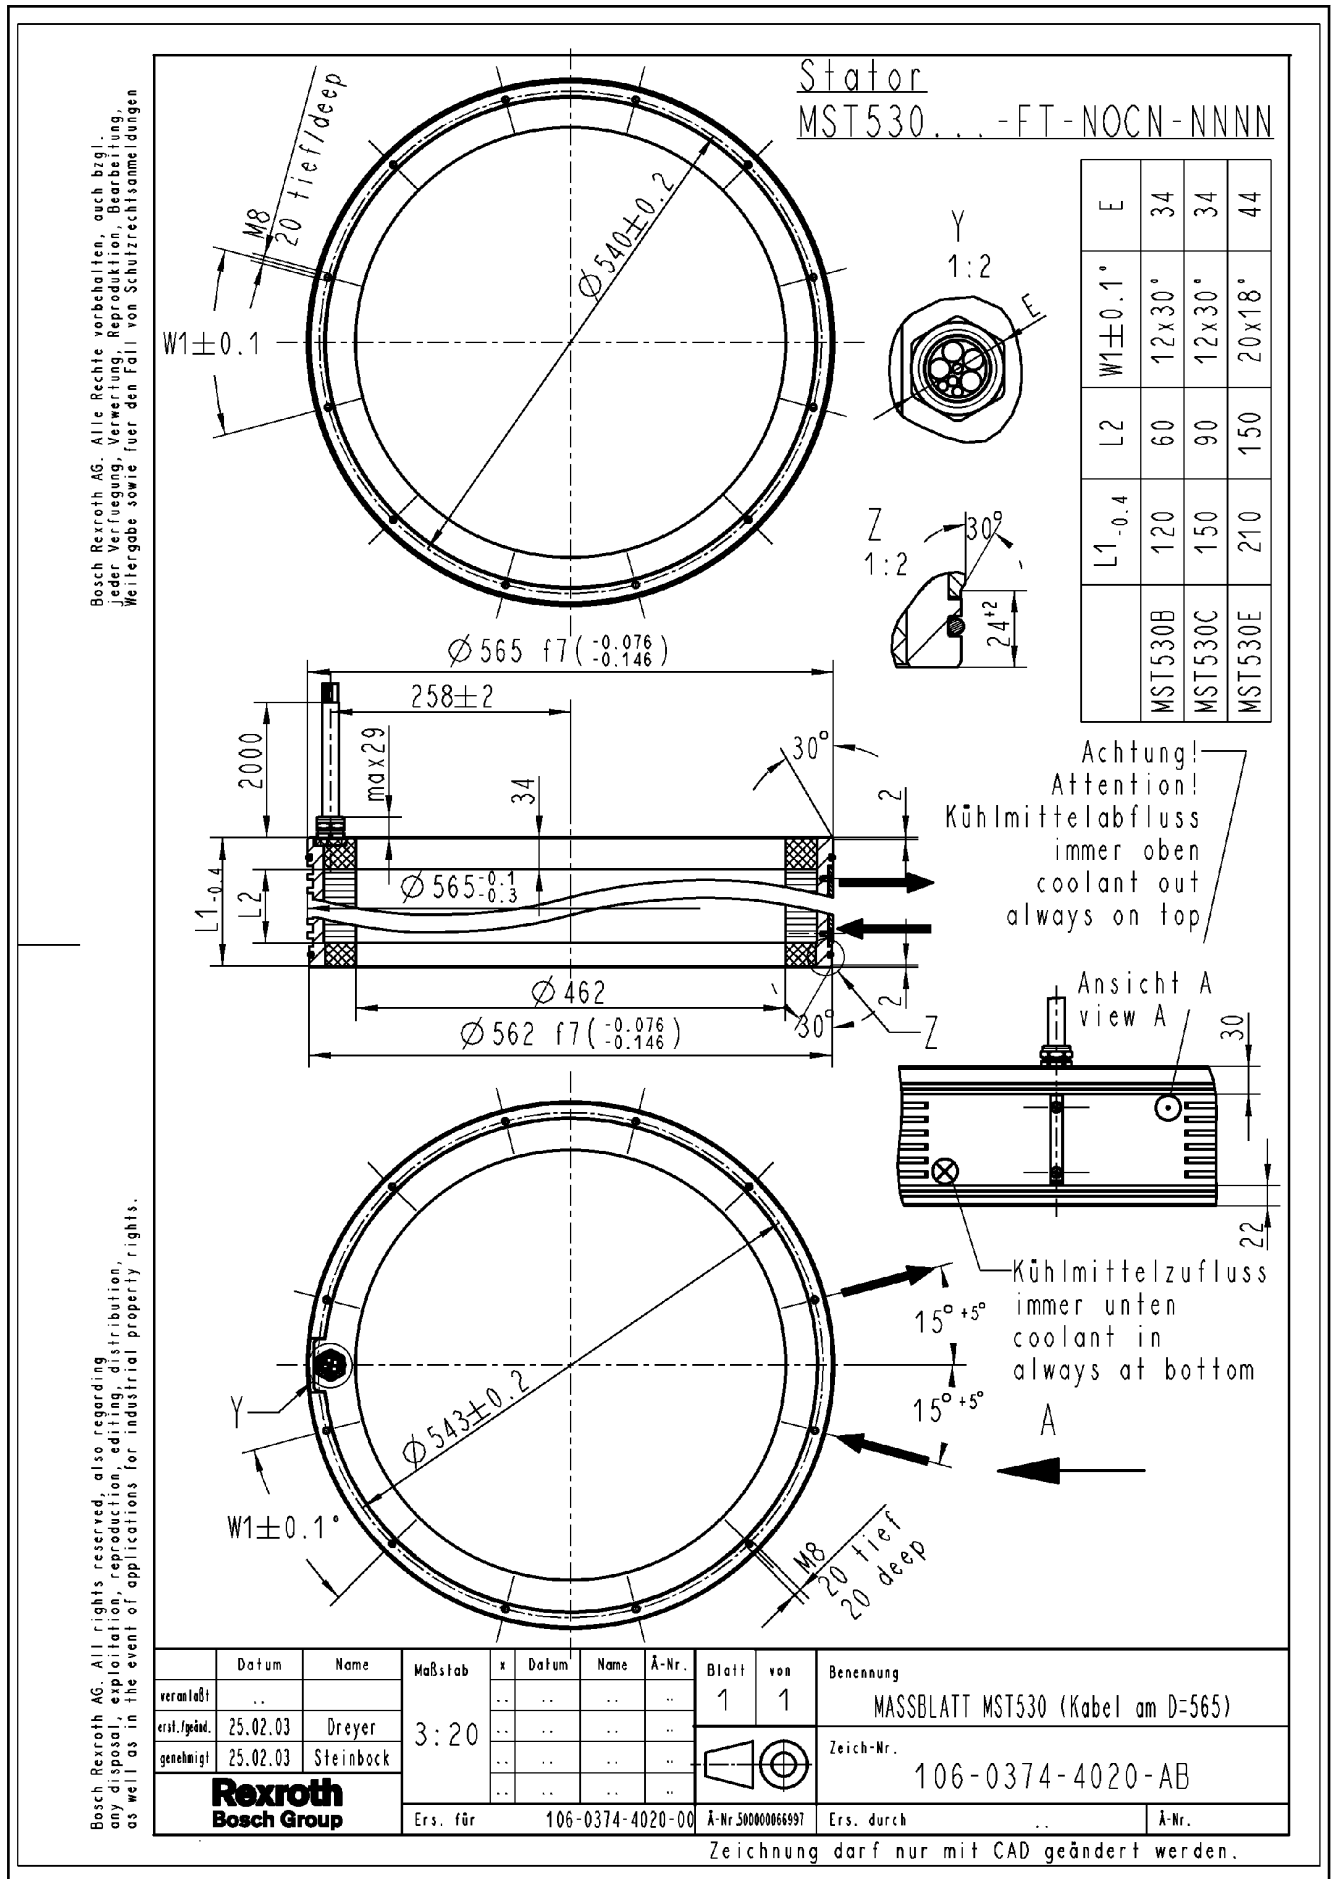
Dimension sheet MST530, electrical connection "CN"
